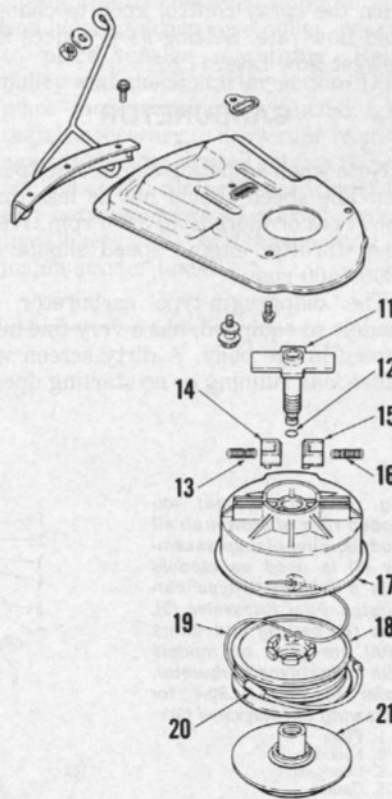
Exploded view of lower head on Model ST-80. Models ST-100 and ST-120 are similar.
